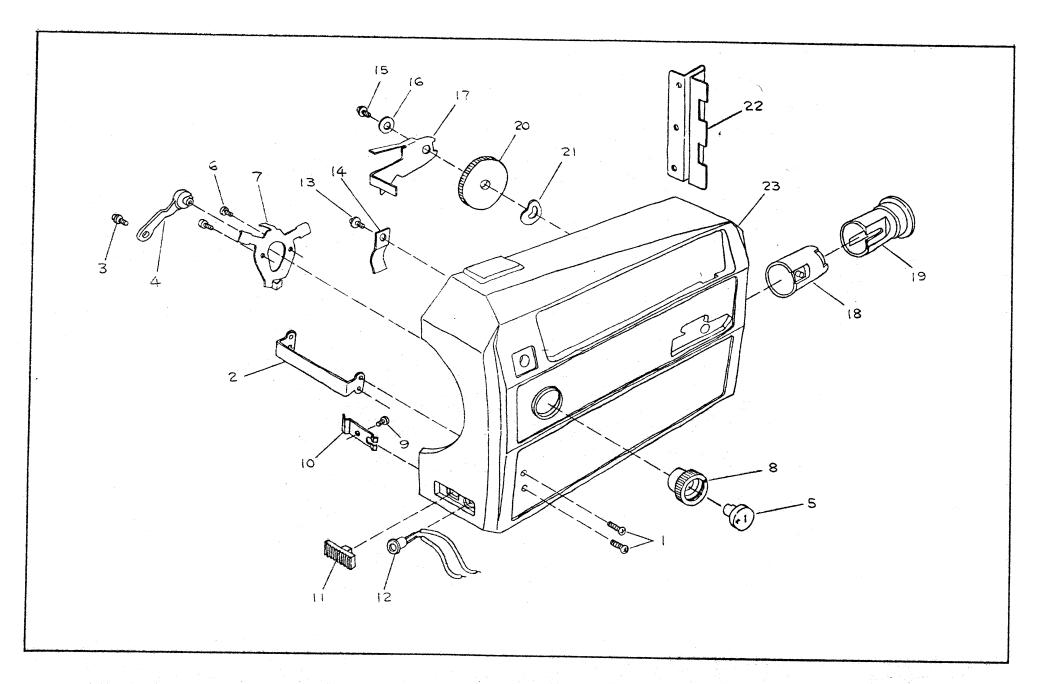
Left Side Housing Assembly - CARTER GAUCHE -
